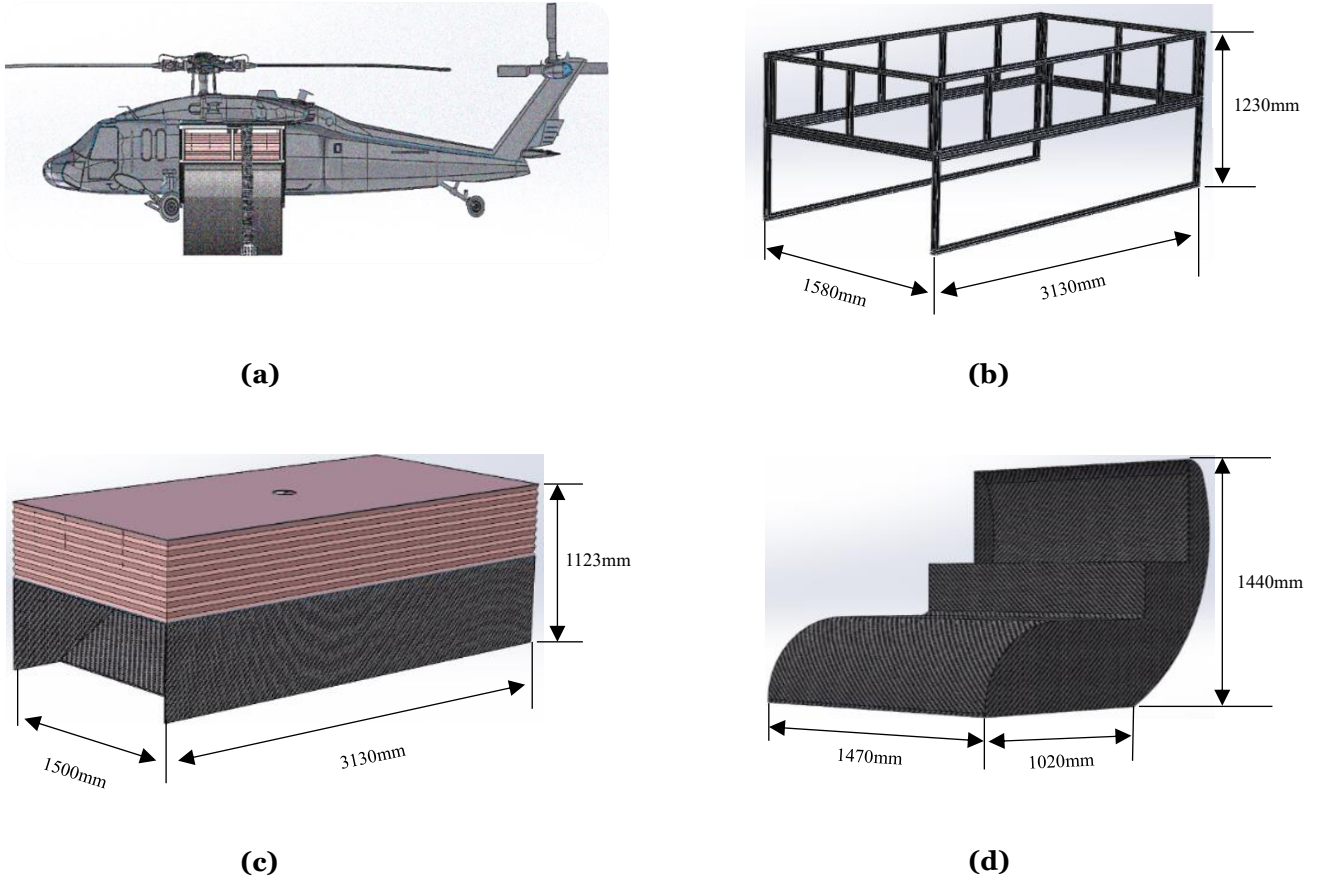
a) General View b) Main Chassis c) Main Tank d) Glide Path
